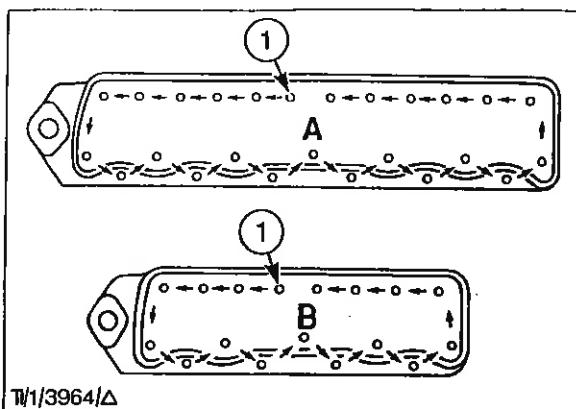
Cylinder Head Bolts Tightening Sequence
